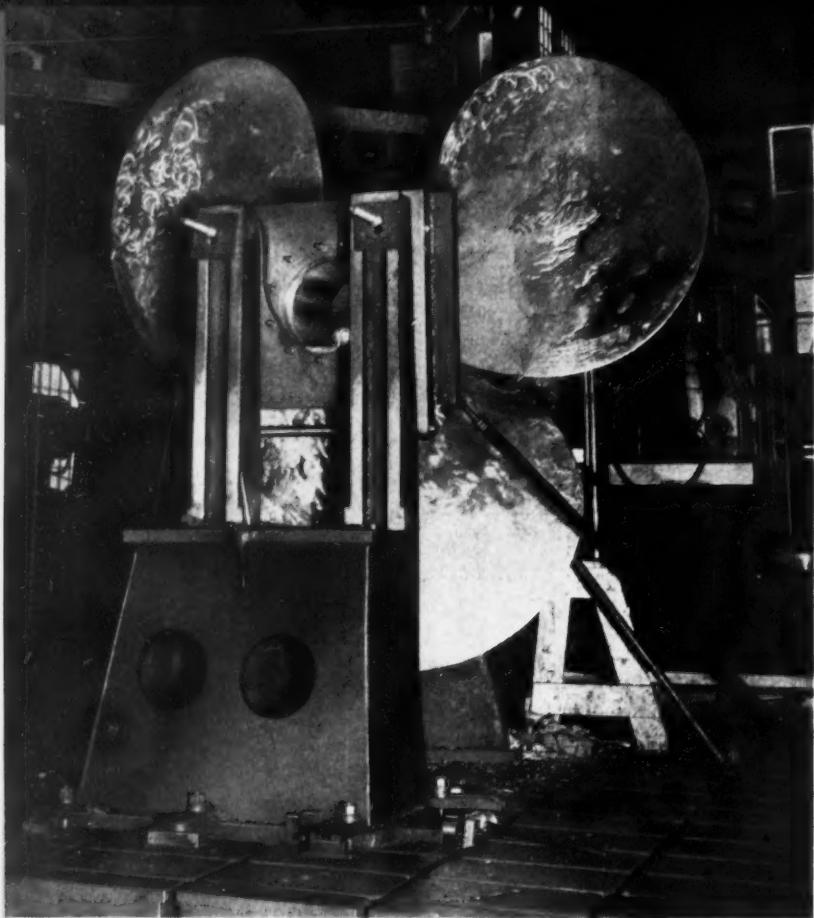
Special Fixture Used on the Draw-cut Shaper Shown in Fig. 1, which Enables Propellers to be Tilted to the Angle of Bore Taper
